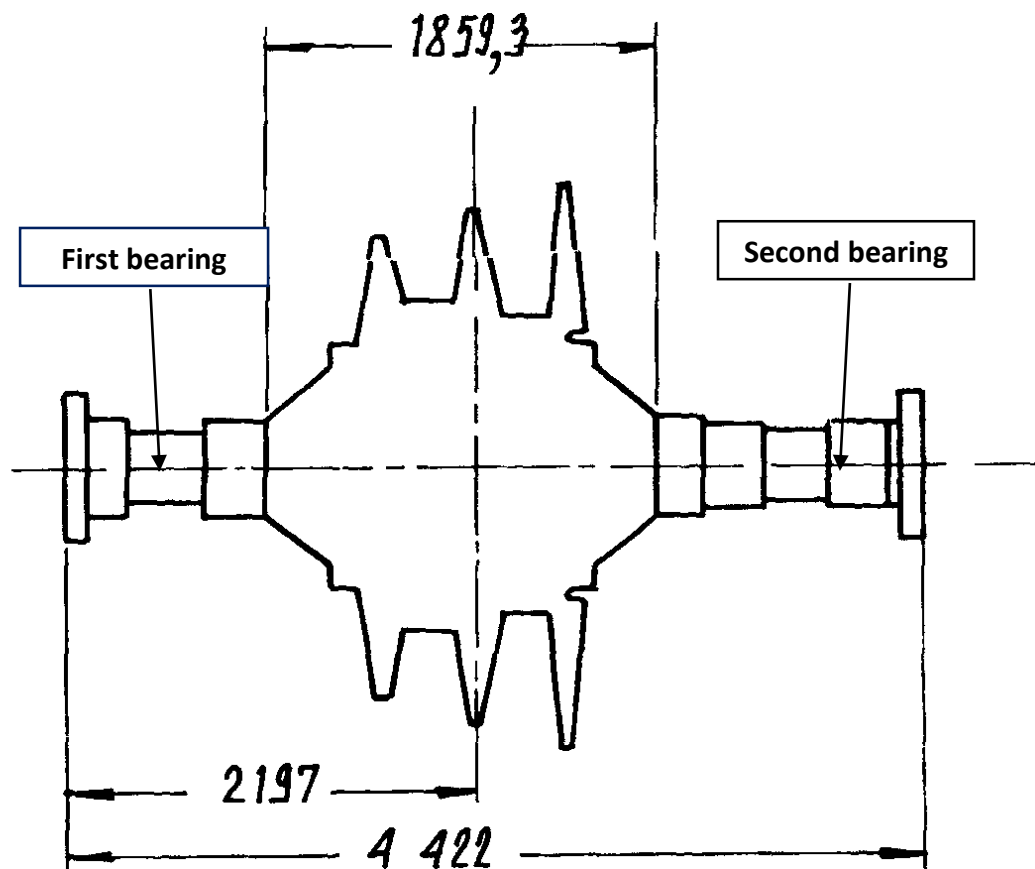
the dimensions for the Turbine Rotor by millimeters.
